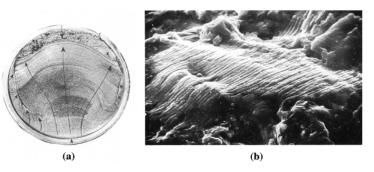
Fatigue fracture surface. (a) At low magnifications, the beach mark pattern indicates fatigue as the fracture mechanism. The arrows show the direction of growth of the crack front, whose origin is at the bottom of the photograph. (b) At very high magnifications, closely spaced striations formed during fatigue are observed (x 1000).
